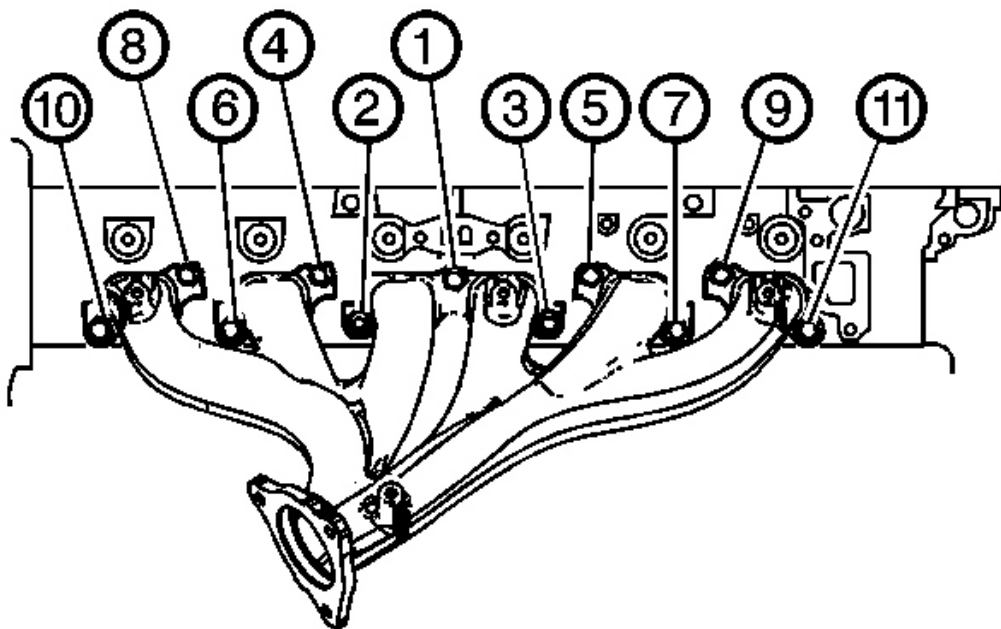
Exhaust Manifold Bolt Tightening Sequence
